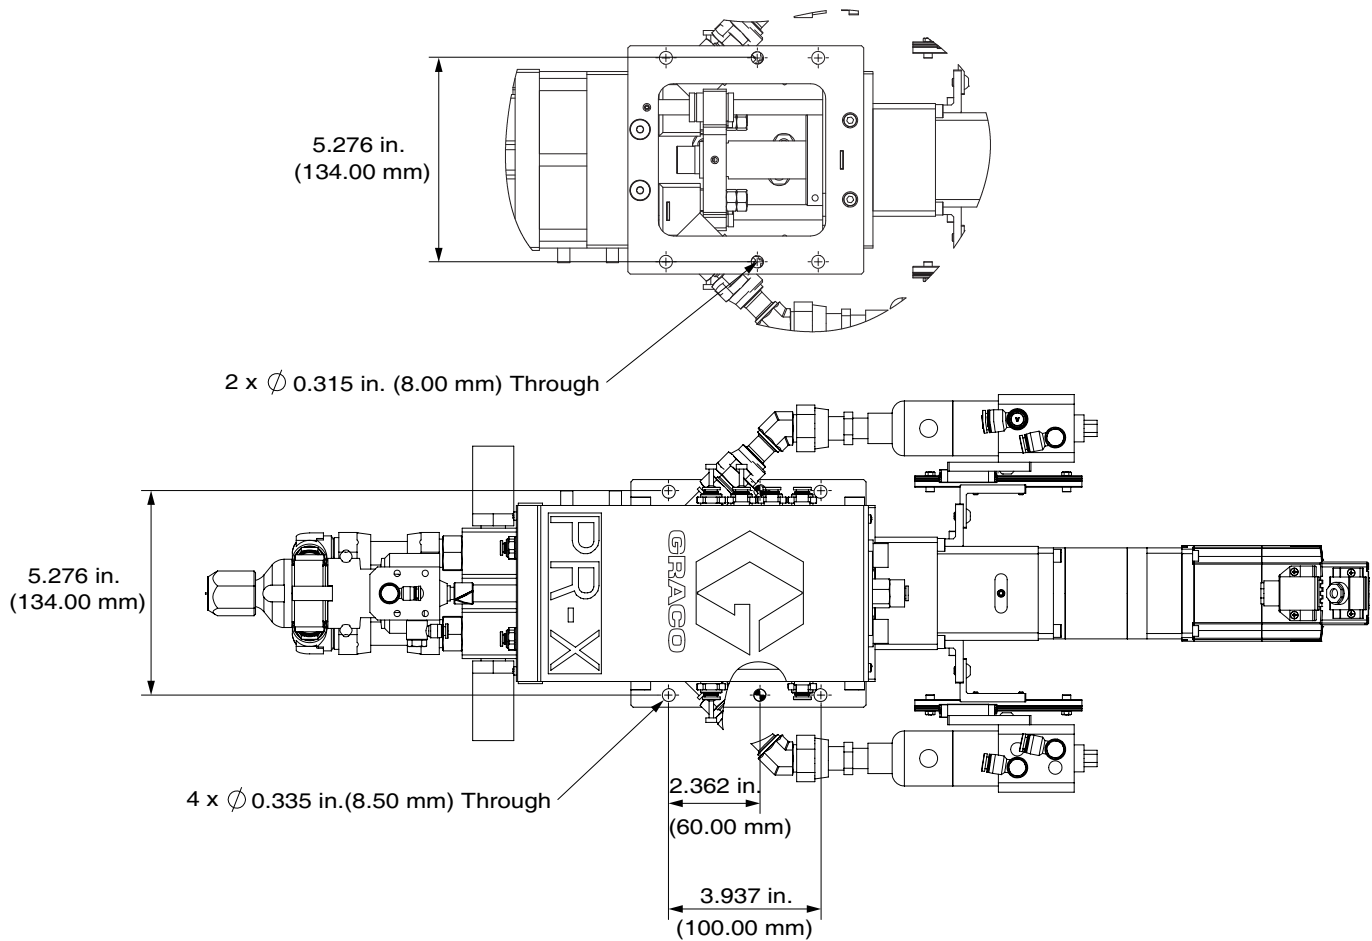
Mounting Hole Dimensions for Installing the PR-X Machine - Supply Pump Feed
